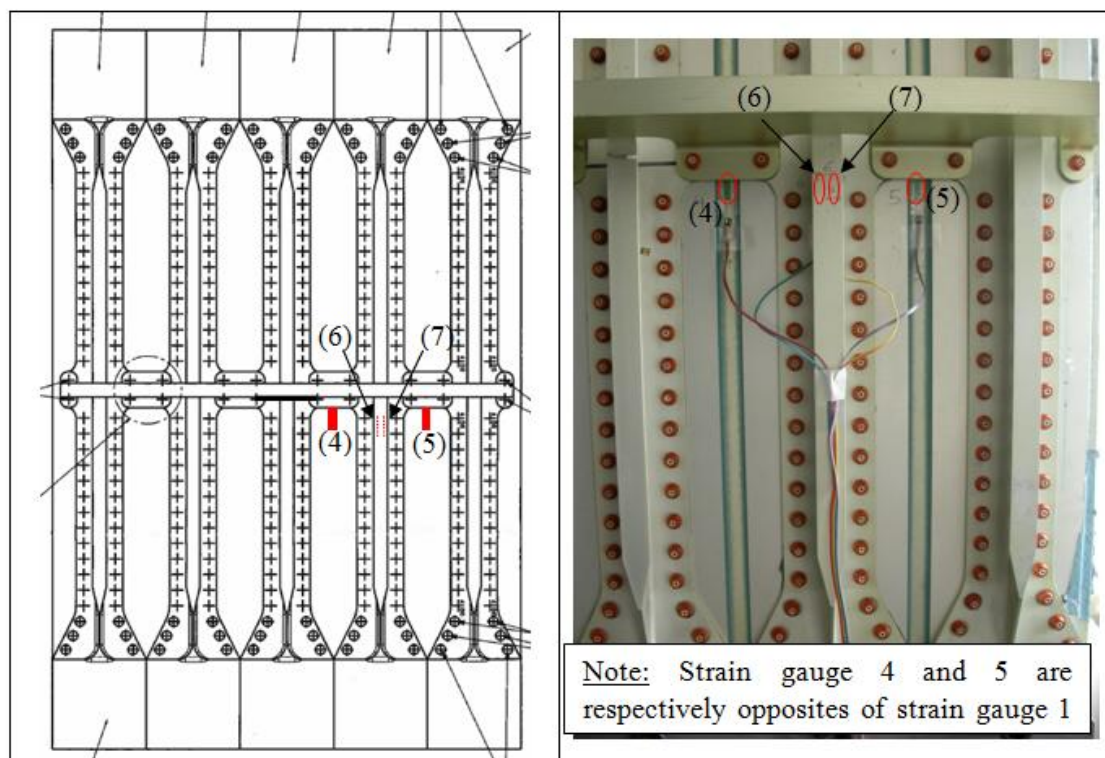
Panel 4 strain gauge location – Back view (strain gauge 4, 5; 6 and 7)
